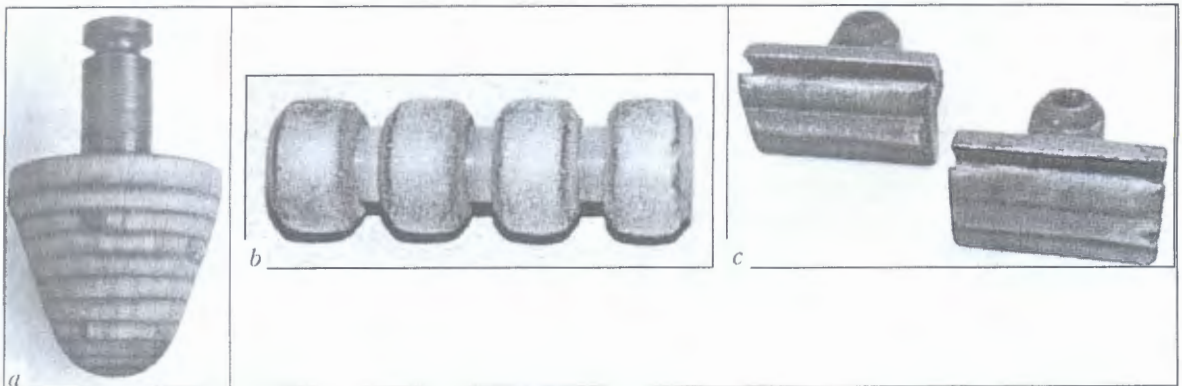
Examples of parts surfaced with composite materials with separate wire feed: *a* — crusher tooth; *b* — calibration rolls; *c* — crusher baffles
